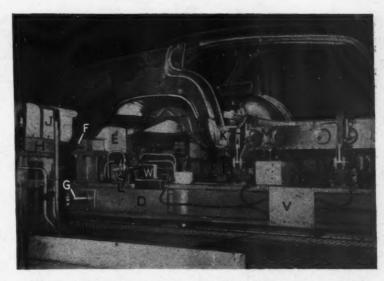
A view of the rear end of a trolley jig, at one of the loading stations, showing some of the work-clamping and locating units. The roof sub-assembly is here seen resting on the base of the under-body, preparatory to being mounted in the required position
